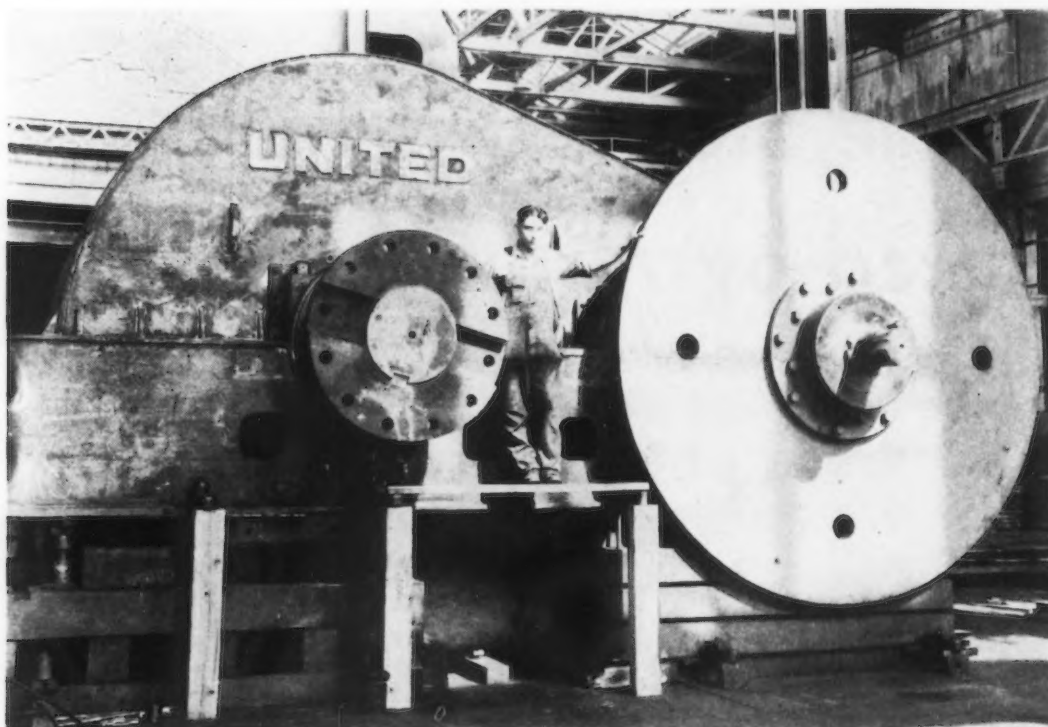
Also fabricated by arc welding is this 1500-hp. mill drive. It is for Japan and will drive a hot sheet mill.
